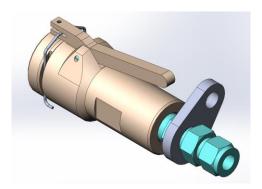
BET Outlet / BEV3 Inlet Coolant Connector.
